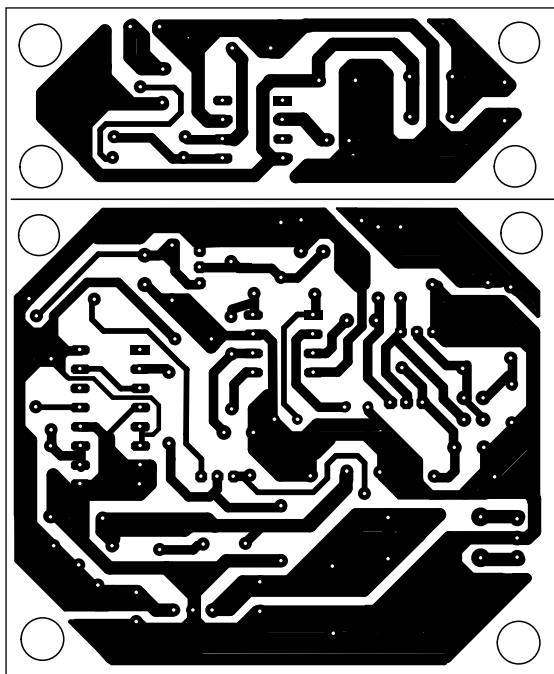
Actual-size, single-side PCB for sound-operated on/off switch
